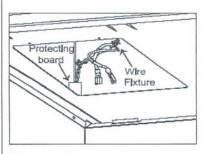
Unscrew two screws on heat insulation board cover and draw it out.
